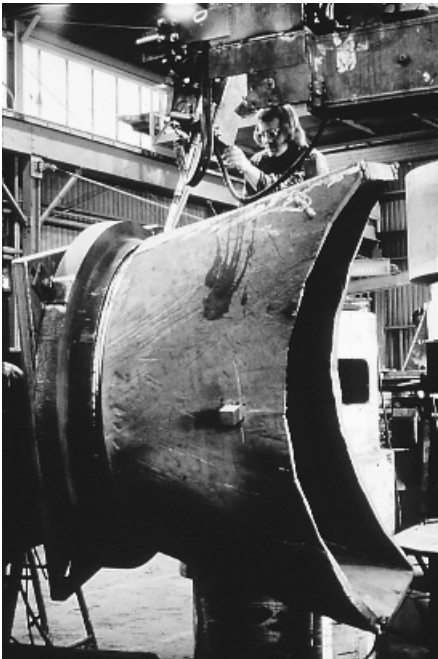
Forged steel flanges being welded to nozzle bodies. (*Dresser-Rand Company, Olean, N.Y.*)
